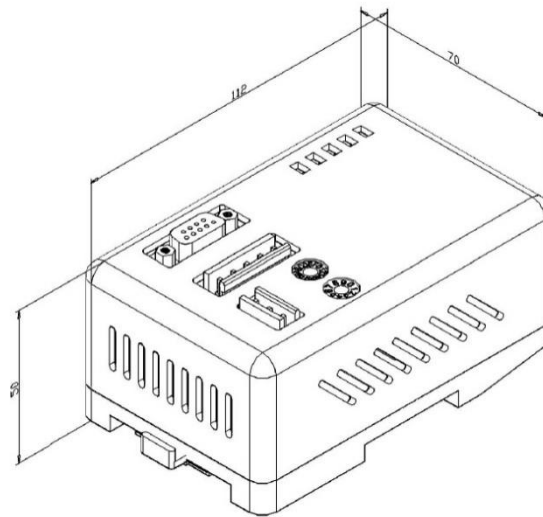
Gateway outline dimension drawing (112\*70\*50, unit mm)
